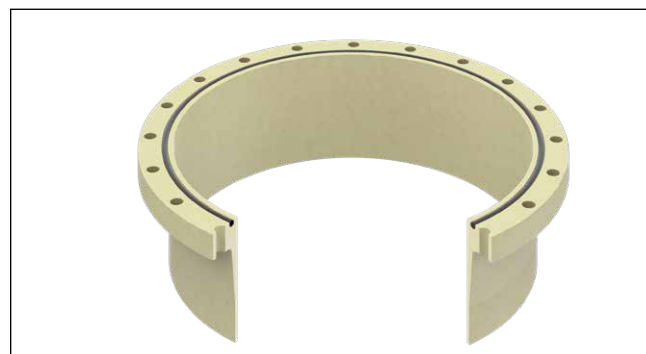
O-ring gasket (considered as a full-face condition for torque setting)
